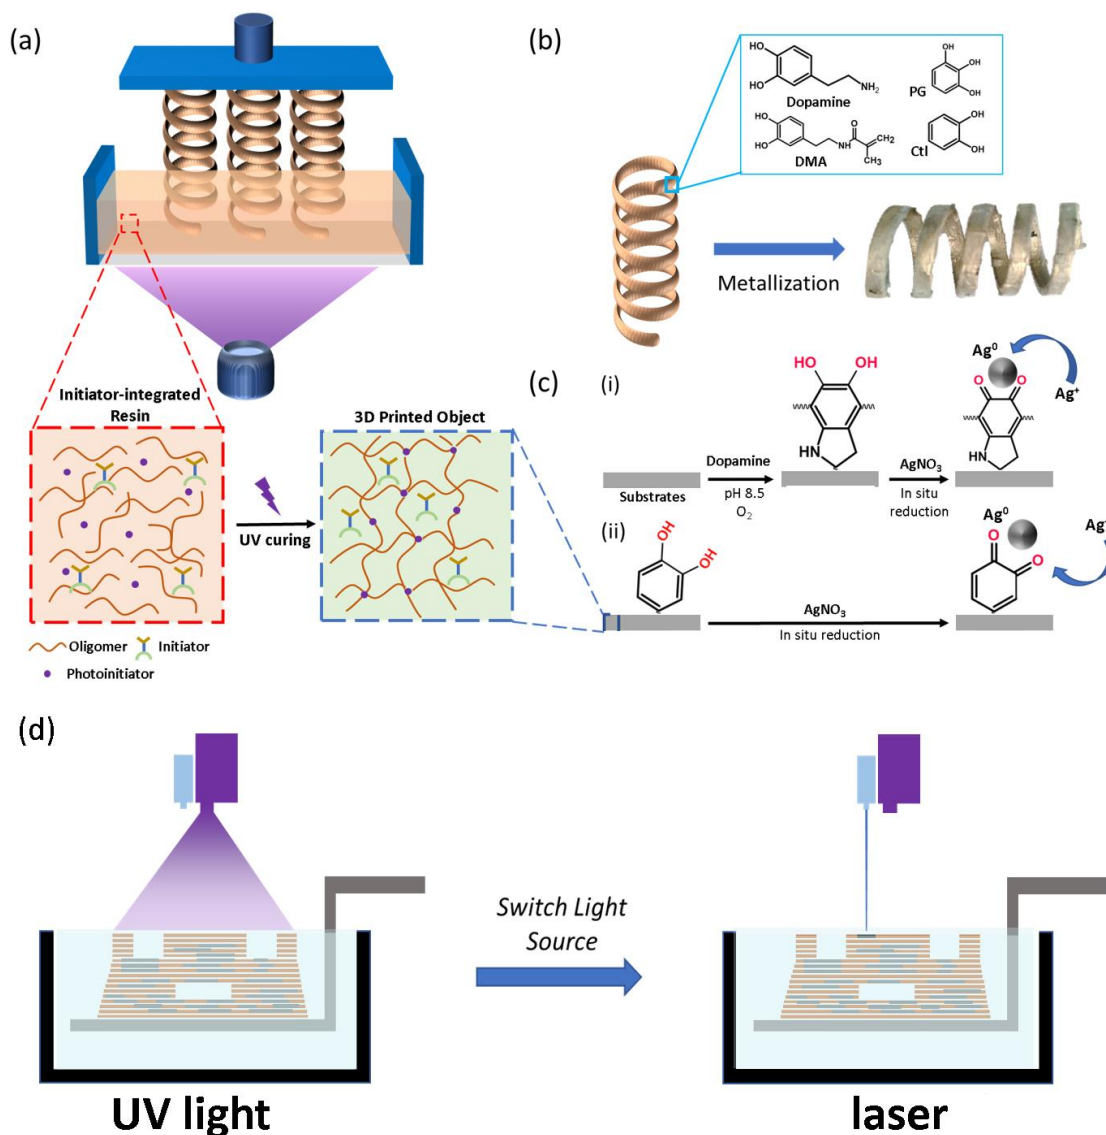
3D printing process of electronics using (a-c) i3DP II and (d) 3D co-printing technology. For i3DP II, (a) initiator-integrated resin is applied into commercial DLP 3D printer, and (b) the functional initiator is distributed throughout the whole UV-cured sample, which can be used in a one-step metallization process. Compared to the metallization process based on dopamine (ci), the printed sample using i3DP II technology can reduce the silver ions in one-step (cii). For 3D co-printing, (d) two lights 3D printing system is proposed: UV light for polymeric structures building and laser for conductive patterns printing.
